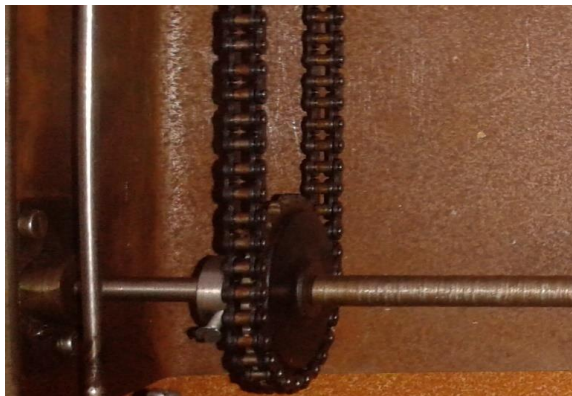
Showing Bush, lock, Sprocket Chain on Back shaft
